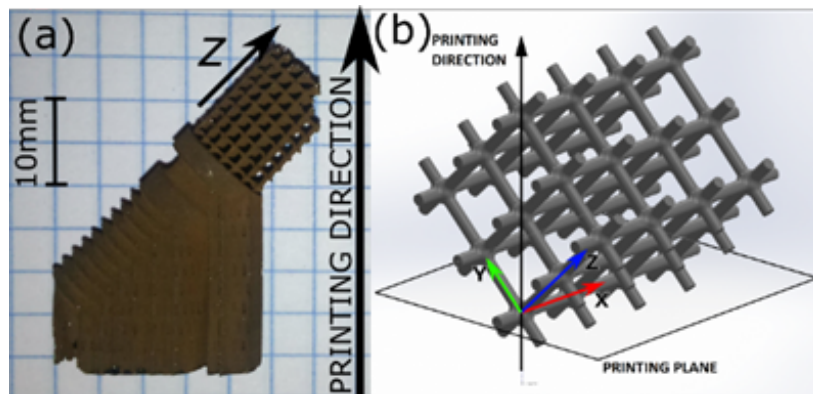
(a) As-built specimen with support structure; (b) details on the orientation of the struts to the printing direction and xyz reference system.
